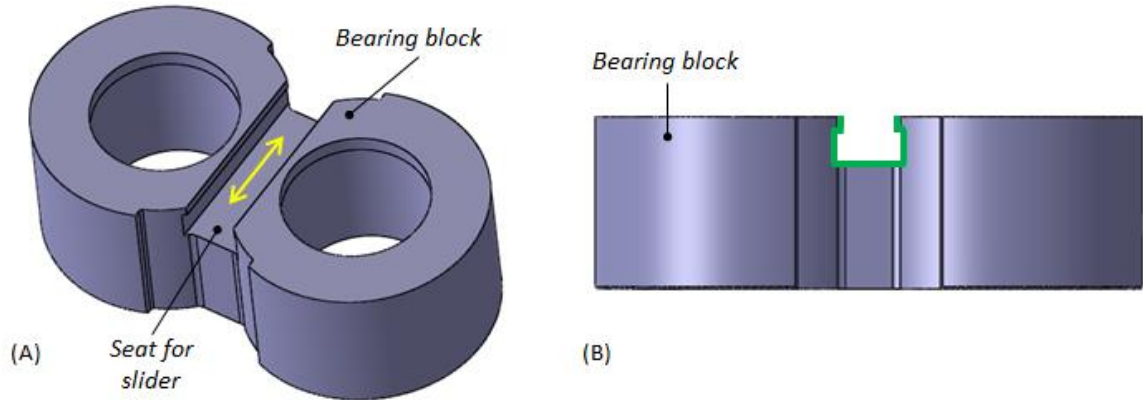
(A) Bearing block for the pressure compensated design; (B) Front view of the bearing block showing the cross-section of the slider seat.
